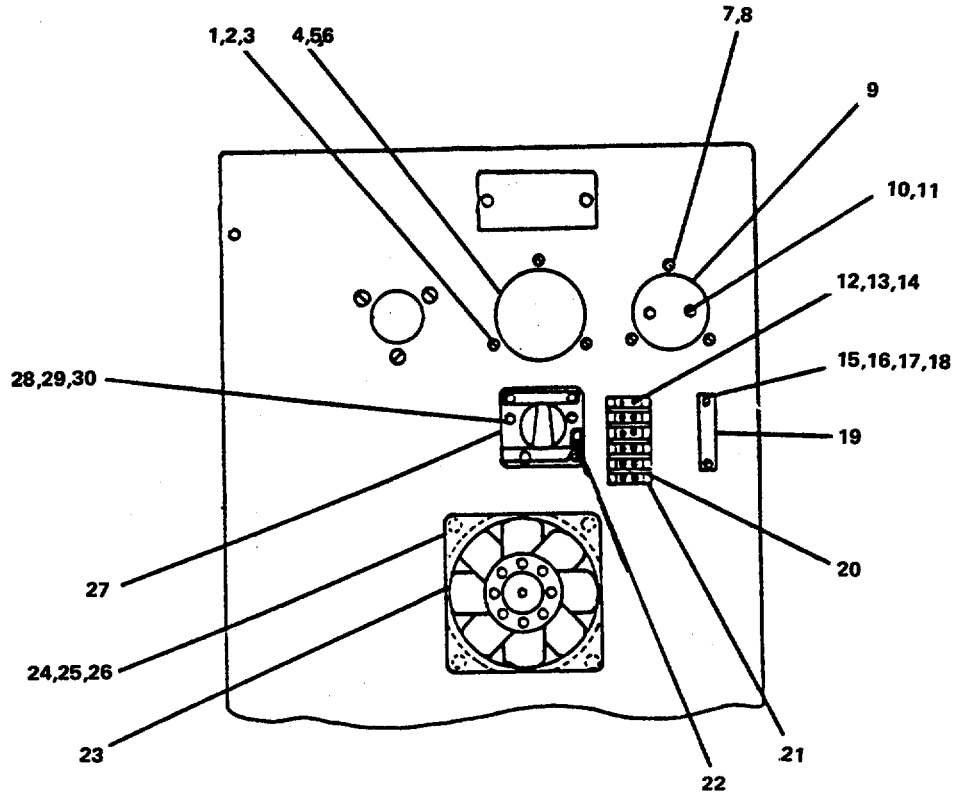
Searchlight Power Supply (Sheet 1 of 3).
